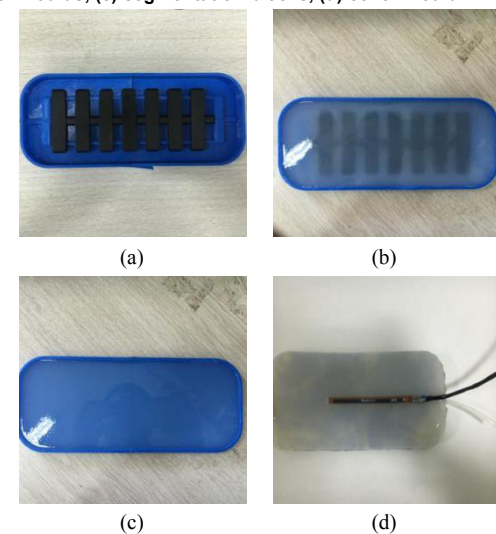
The fabrication procedure of SPEP: (a) assemble the bottom mould, (b) the bottom mold is injected with mixed silicone rubber, (c) the cover mold is injected with mixed silicone rubber, (d) combine two parts of SPEP with silicone rubber.
